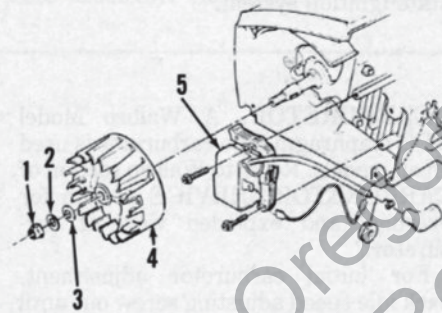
A—Exploded view of solid-state ignition used on later Super EZ Automatic models.
